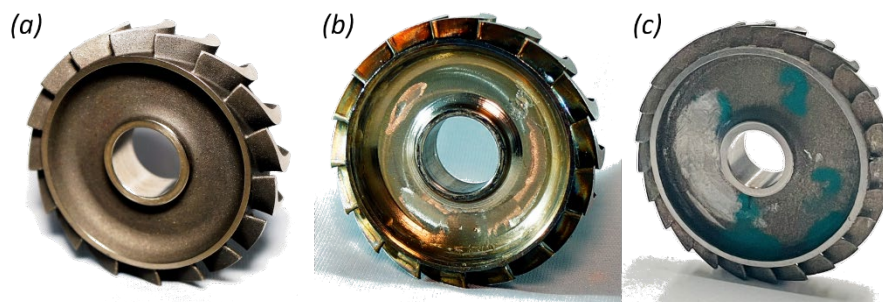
Prototype samples of the turbine wheel made by: (a) casting, (b) machining, (c) additive manufacturing (AM makes it possible to manufacture the design with 25 blades)
